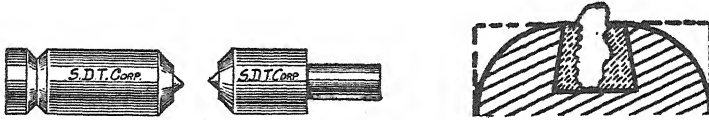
Two Types of Diamond Nibs Furnished by the Standard Diamond Tool Corp. and a Method of Mounting the Diamond.
